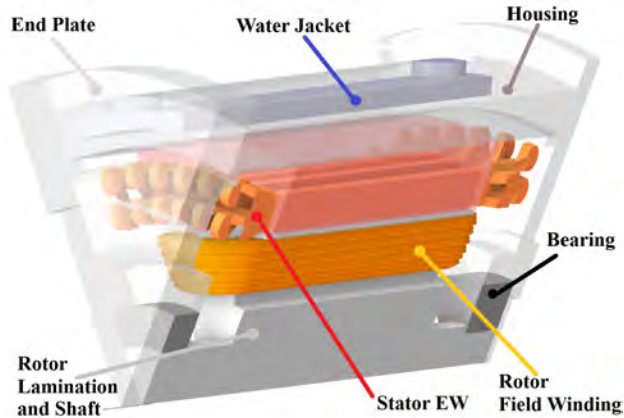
Tridimensional geometry representing one-eighth of the machine used for the CHT model.
